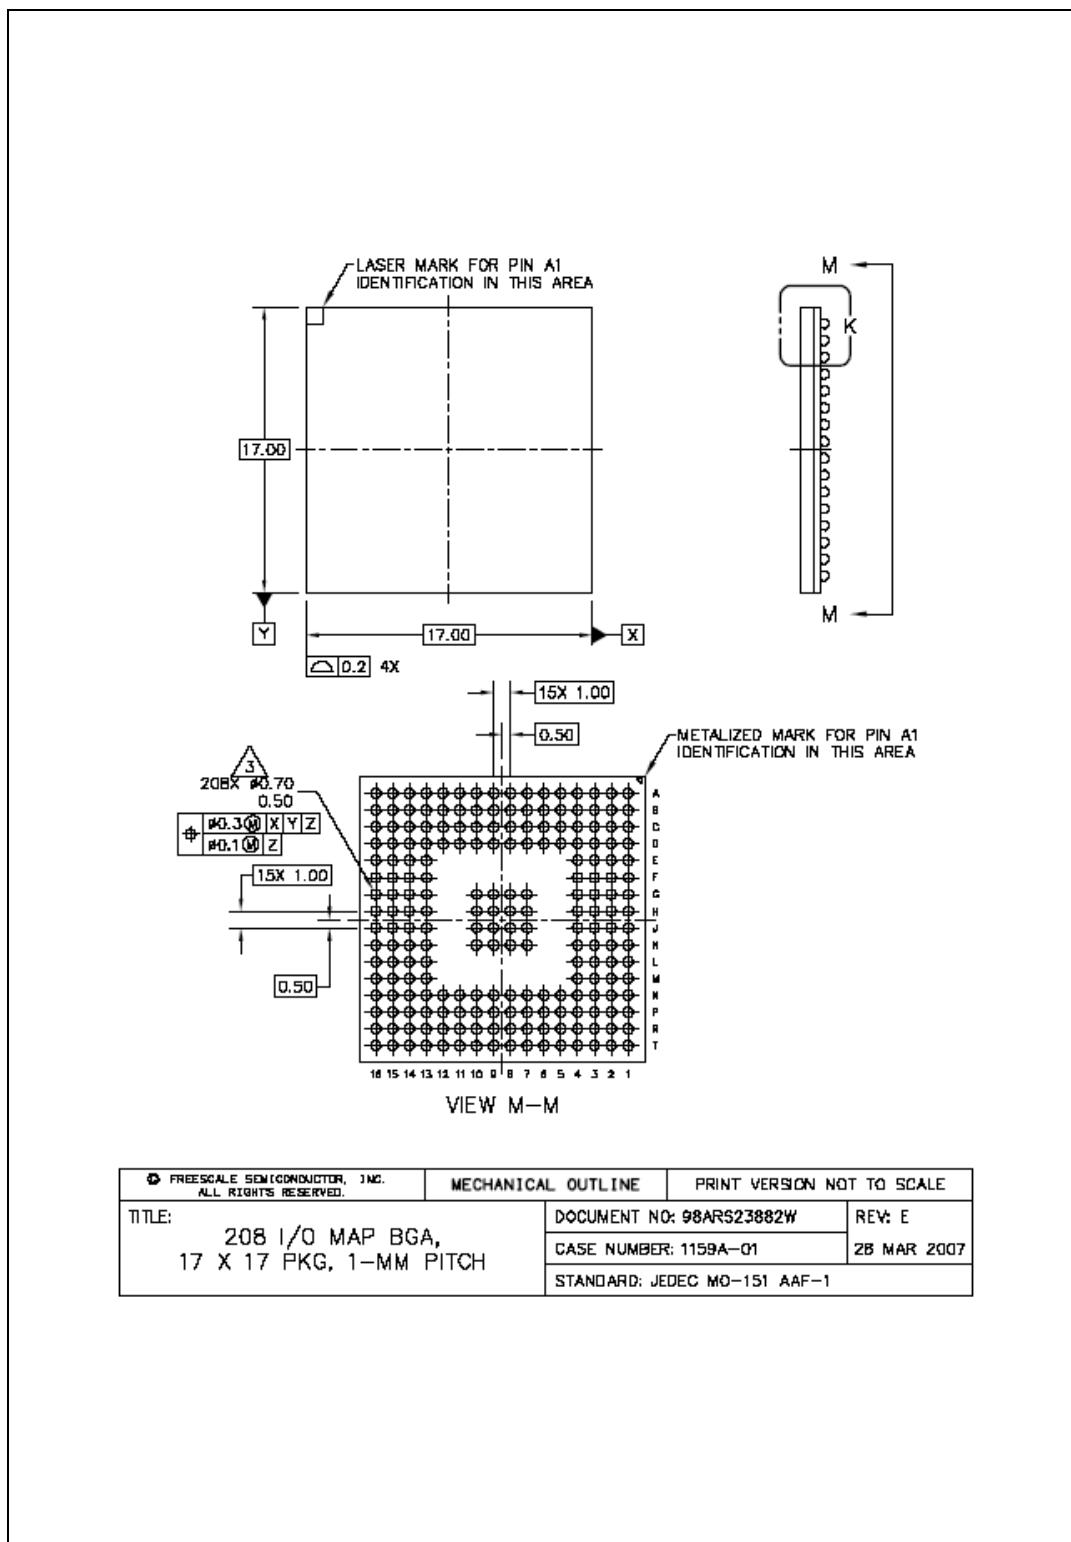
208 MAPBGA package mechanical drawing (1 of 2)
